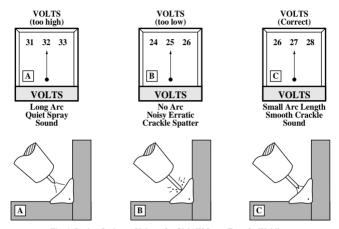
Setting Optimum Voltage for GMAW Spray Transfer Welding.
